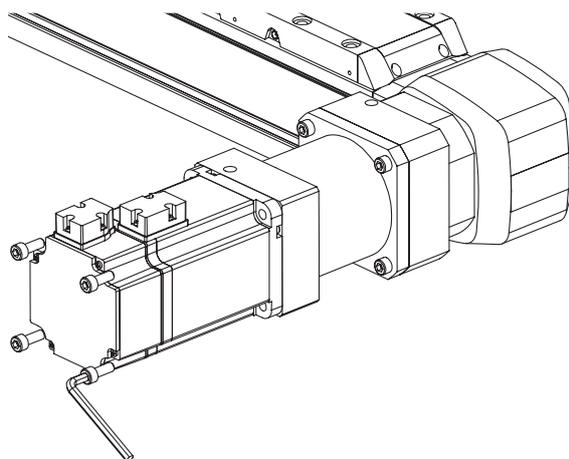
Bolting the motor to the linear axis HM-B with gears
